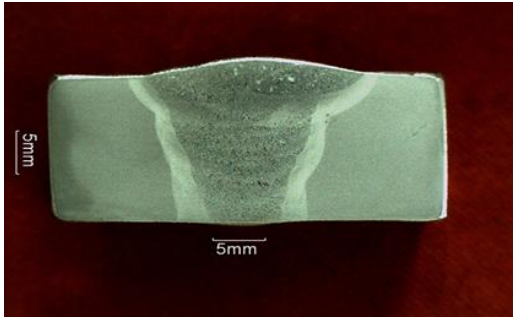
No Defect- OHW-GTAW with delayed post weld Heat Treatment and Macrostructure of Welds
